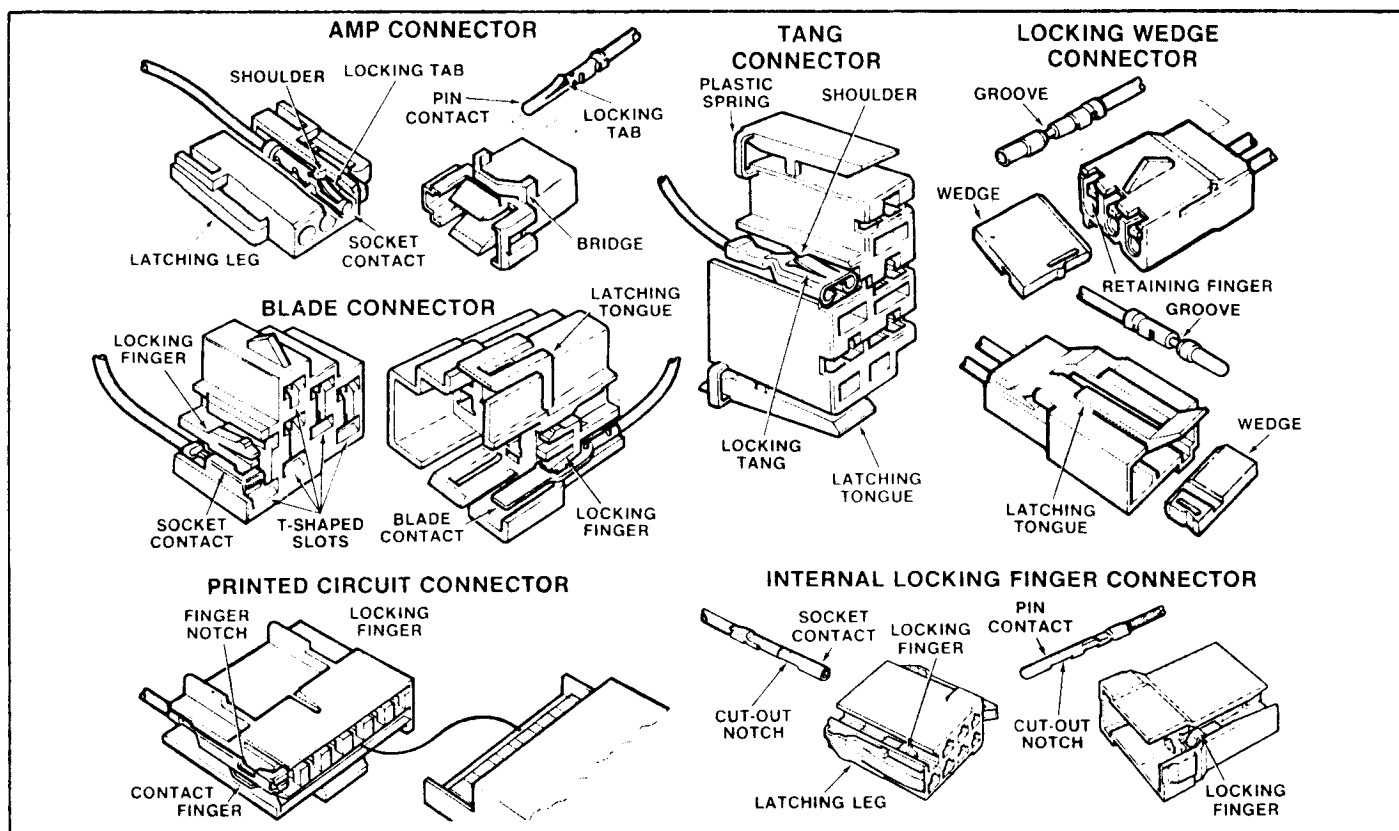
SIX TYPES OF HARD-SHELL CONNECTORS
